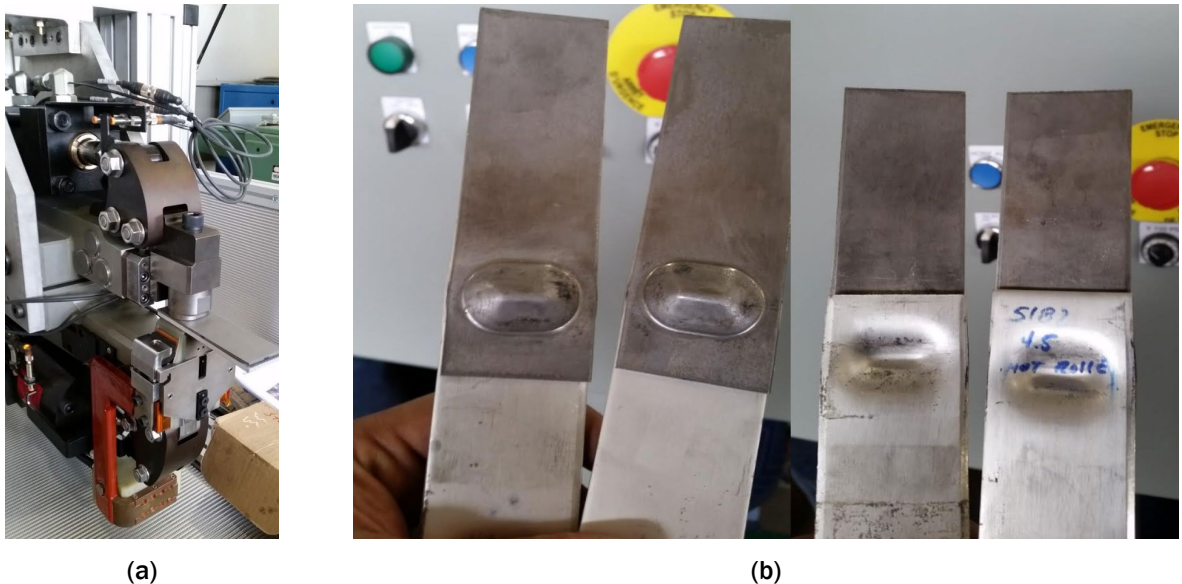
Prototype weld head test: (a) the fixture during welding; and (b) the AA 5183-HSLA340 coupon welds created by the system. Source: The Ohio State University.
